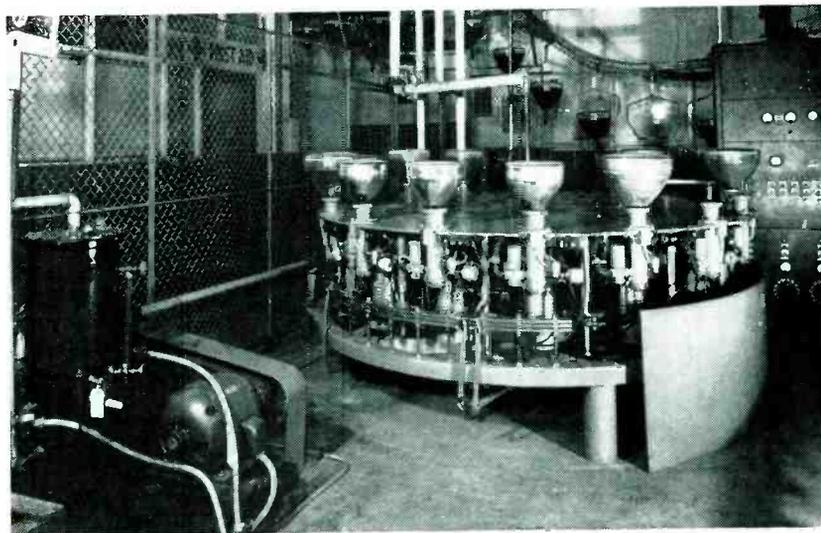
In this aluminizer machine, each tube position has a separate diffusion pump and electrically operated roughing and bypass valves. Mechanical backer pump at left connects through a rotating joint
